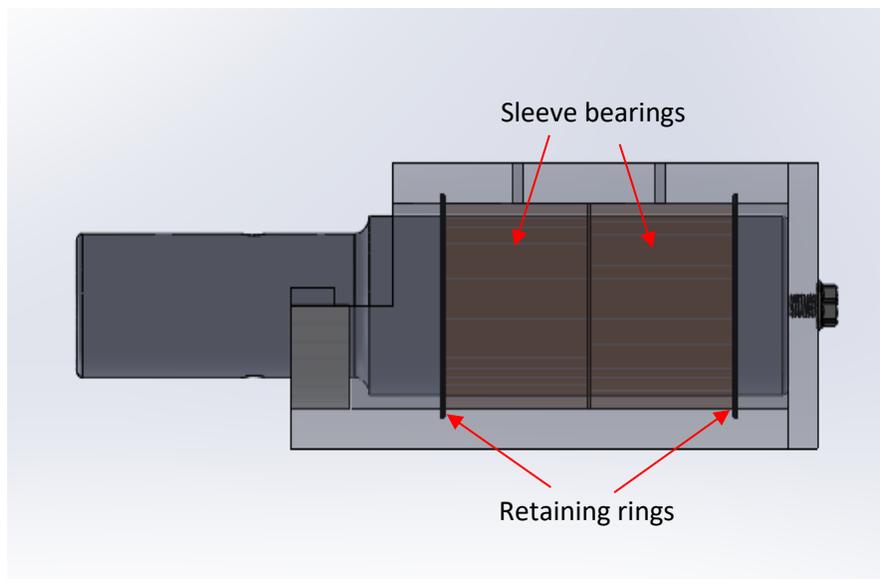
Shaft and Shaft Housing assembly with Sleeve bearings and Retaining Rings, Shaft Housing
